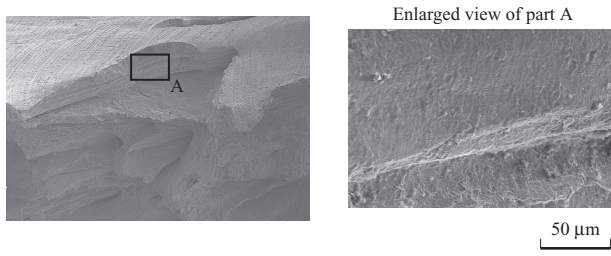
Fracture surface of DDC in dissimilar joint test (FM52M)
